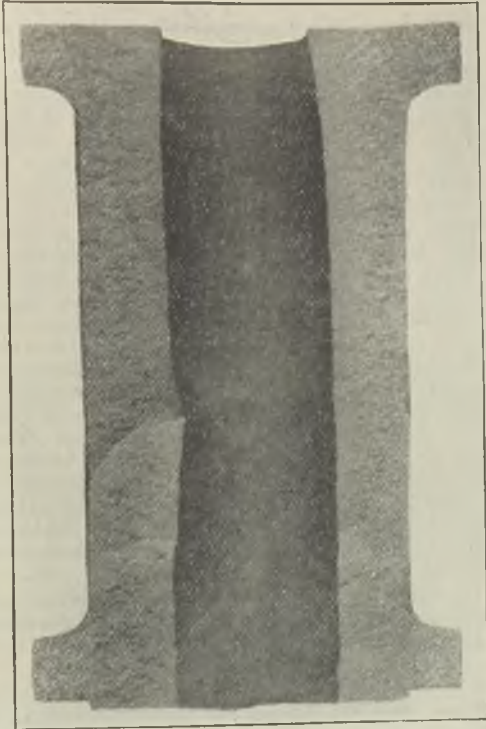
FRACTURED HYDRAULIC CYLINDER
